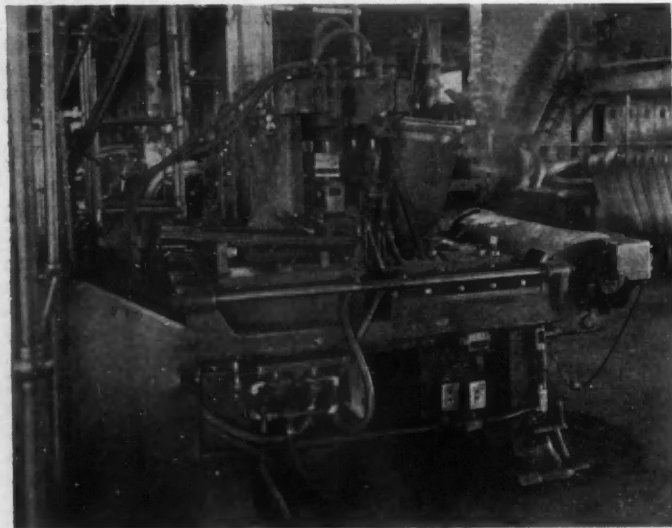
FLASH WELDING ON A STANDARD WELDING-MACHINE
